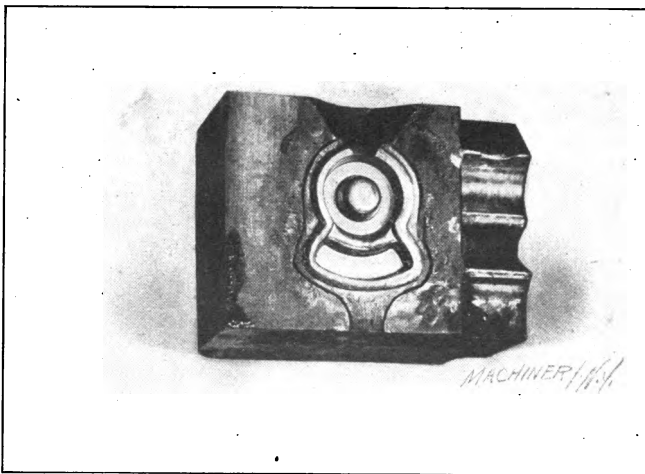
An Example of Drop Forging Die Showing Breaking-Down Die at the Right
